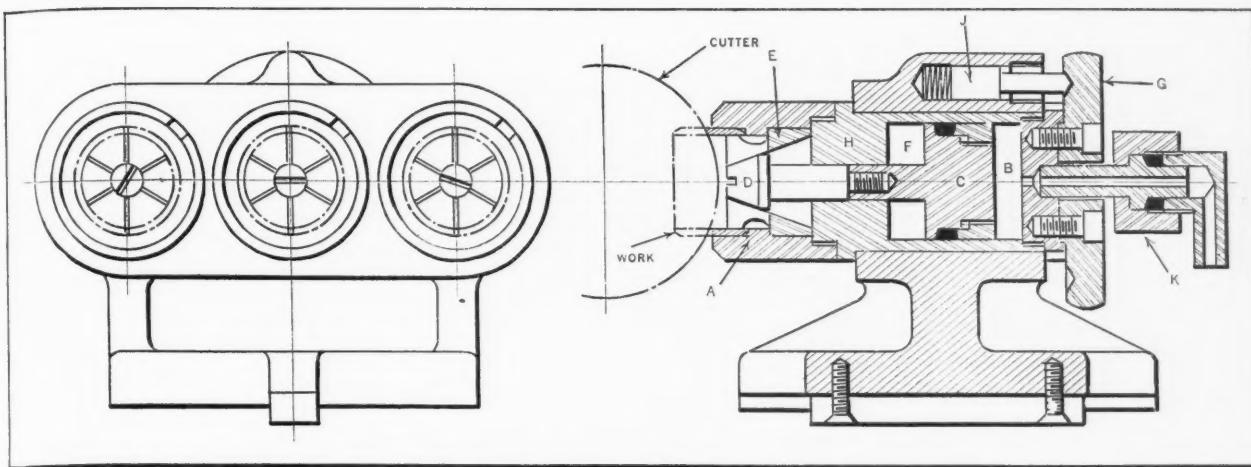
Indexing Type of Fixture Employed in Slotting Small Pieces of Tubing
